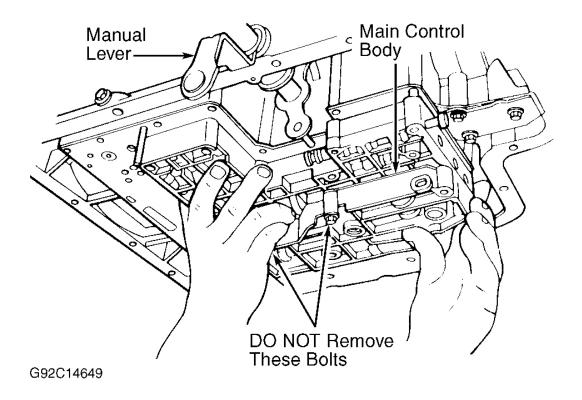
Removing Main Control Valve Body Courtesy of FORD MOTOR CO.
